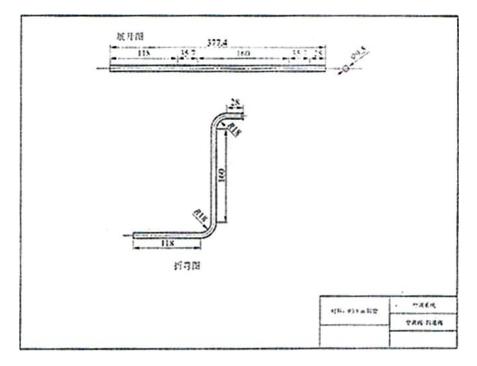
Dimensional drawing of air conditioner pipe 8
